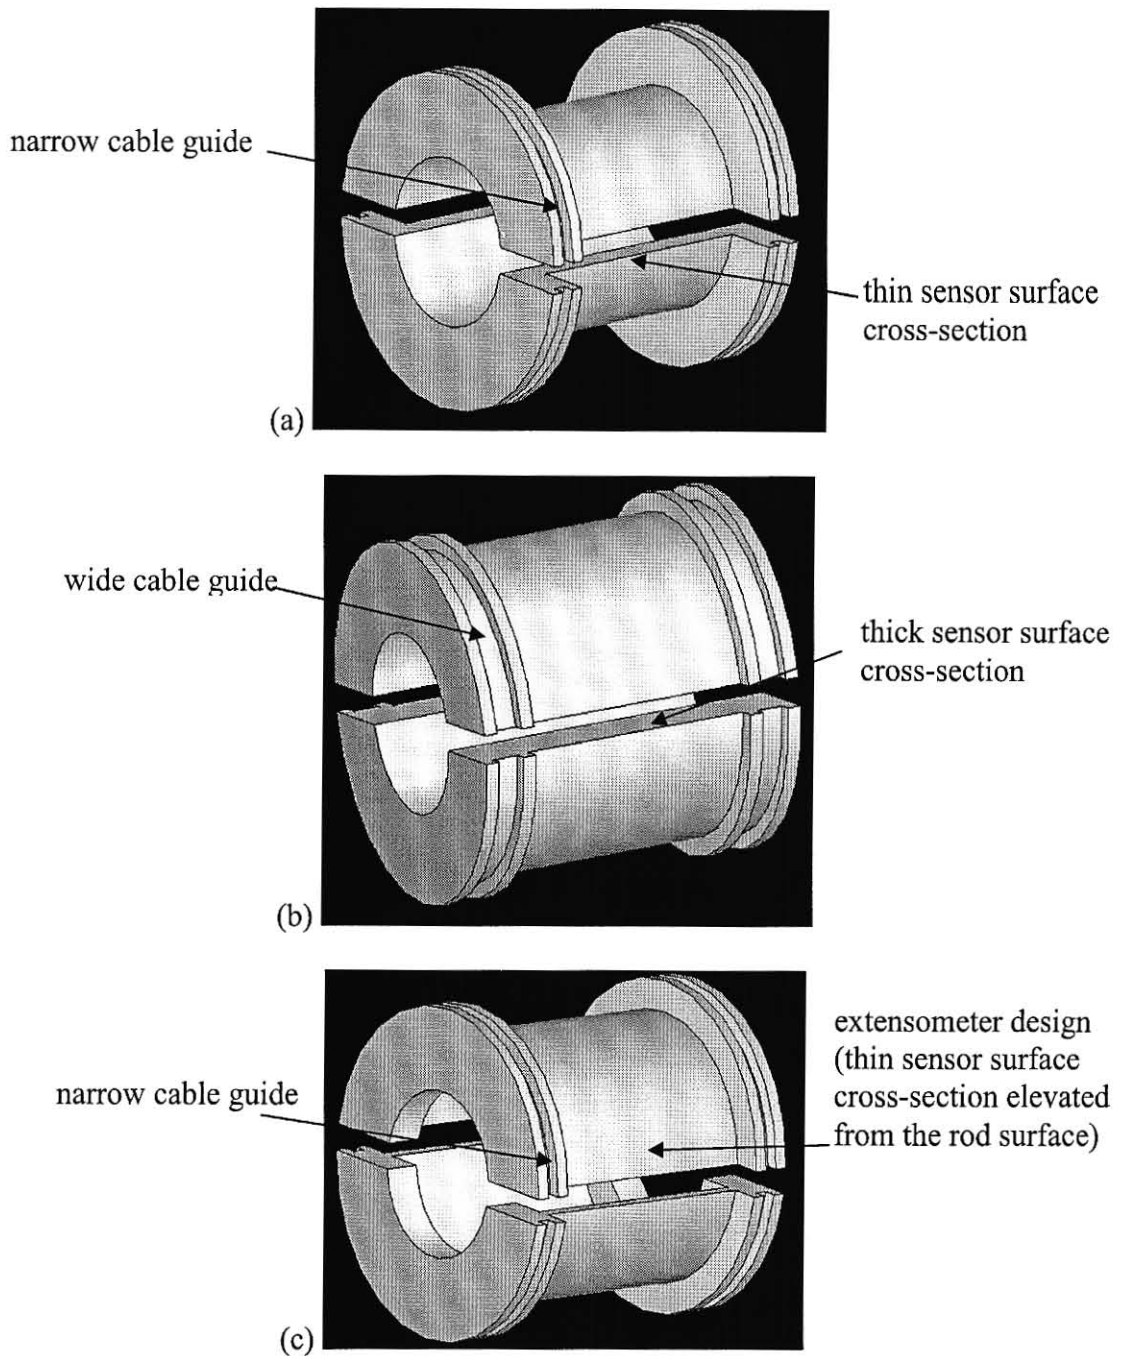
Initial housing designs with (a) housing with a thin wall section next to the rod surface and a thin wire channel, (b) housing with a thick wall section near the rod surface and a wide wire channel and (c) extensometer design with a thin wall section that is elevated away from the rod surface.
